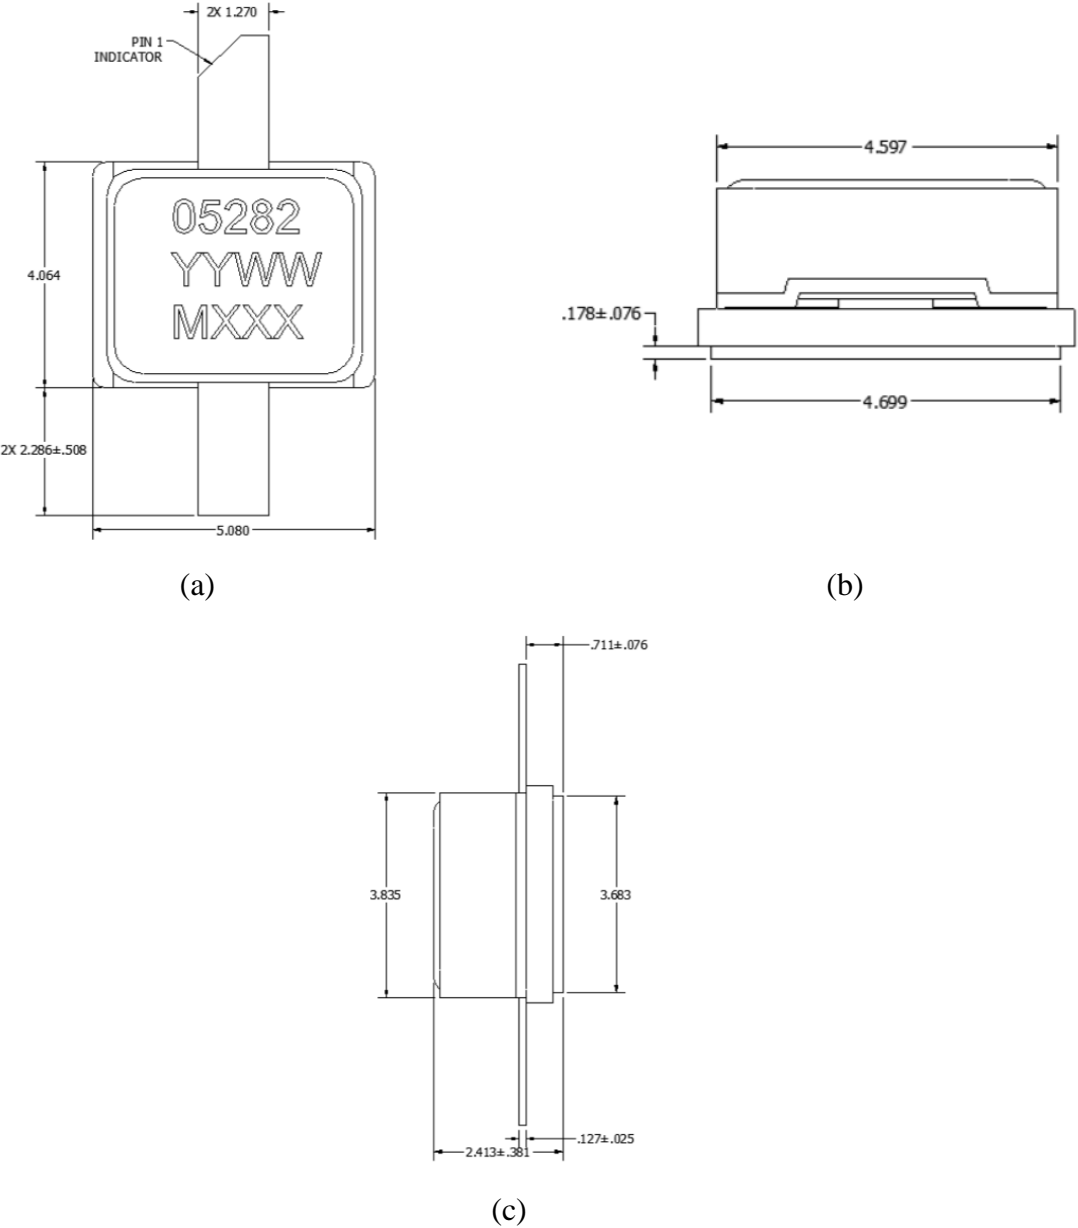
(a) Top view, (b) side view, and (c) frontal view dimensions of Qorvo T2G6000528-Q3 [34].
